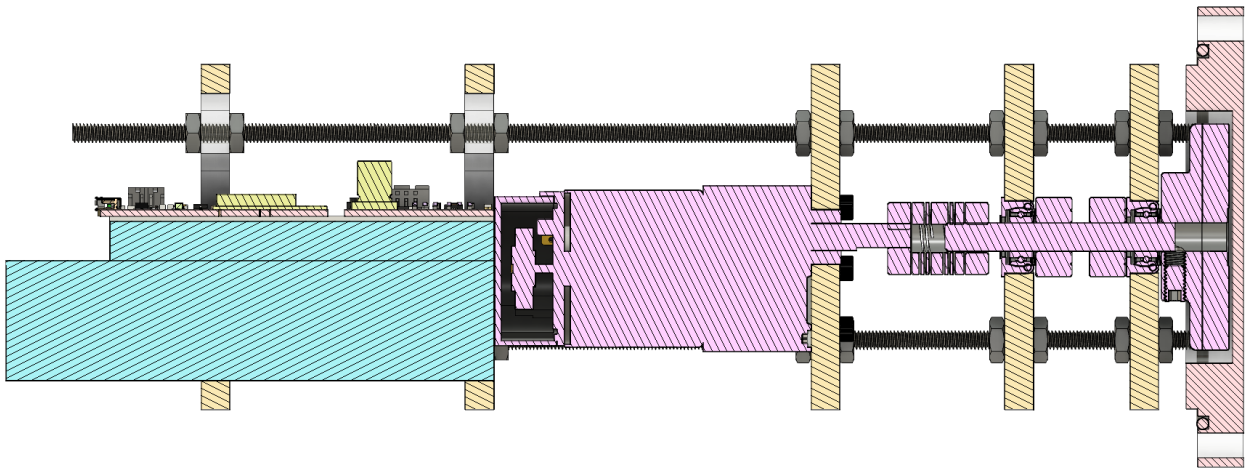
CAD - Cross-sectional View of Internal Sub-Assembly.
